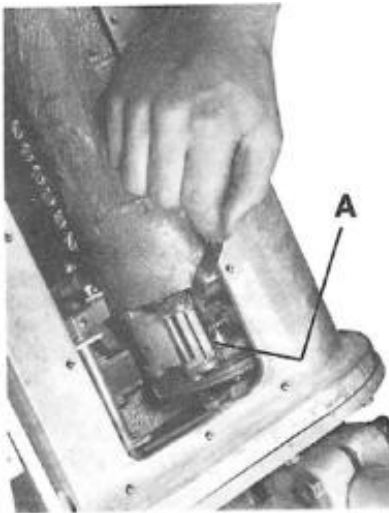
Adjusting bolt is located under top cover between the two parallel tension springs.
